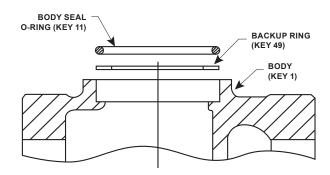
Expanded View of the Body Area Showing the Body Seal O-ring and Backup Ring Placement
